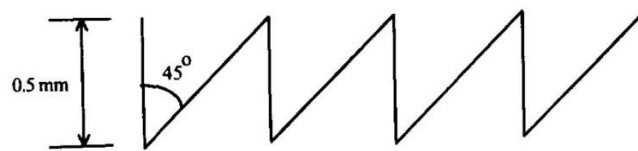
Mechanically machined saw-tooth grooves for SE suppression. Grooves in the shape of a saw-tooth were cut into the outer cylinder at an angle of 45 degrees, and a depth of 0.5 mm with a pitch of 32 teeth per inch [27].
